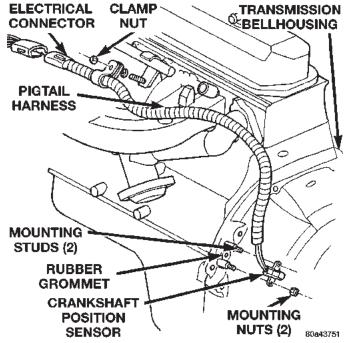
Crankshaft Position Sensor—2.5L Engine
